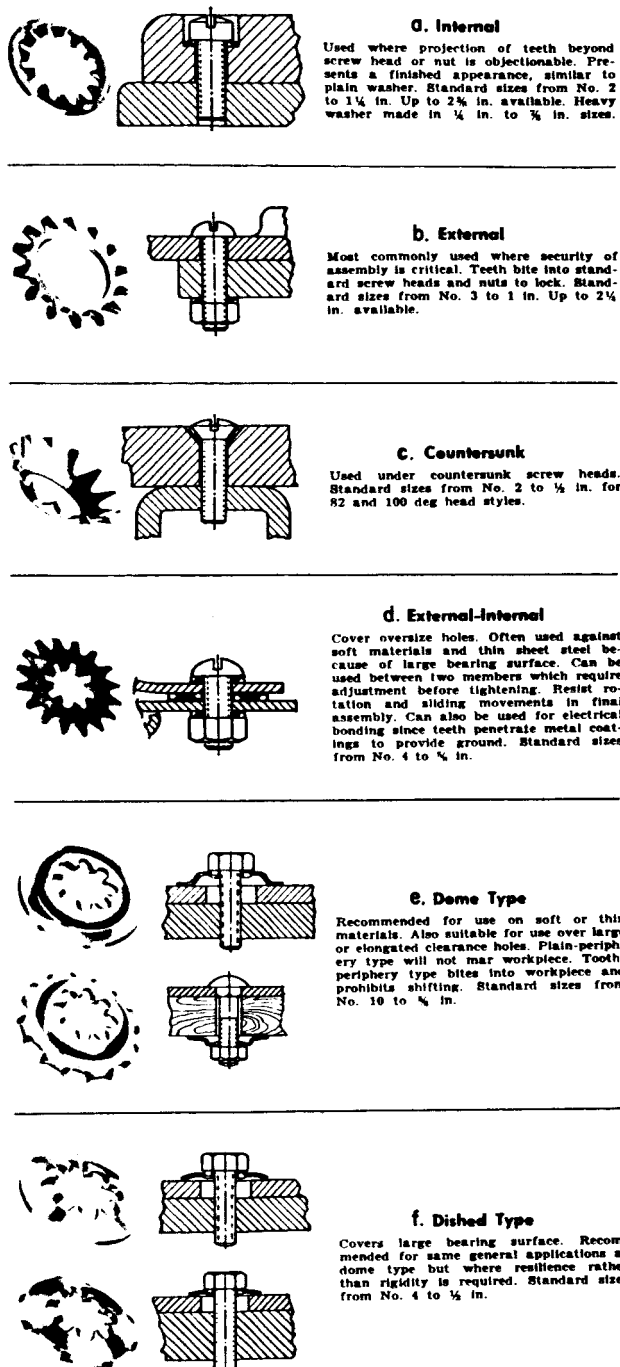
TOOTHED-LOCKWASHER DESIGNS (REF. 1)
